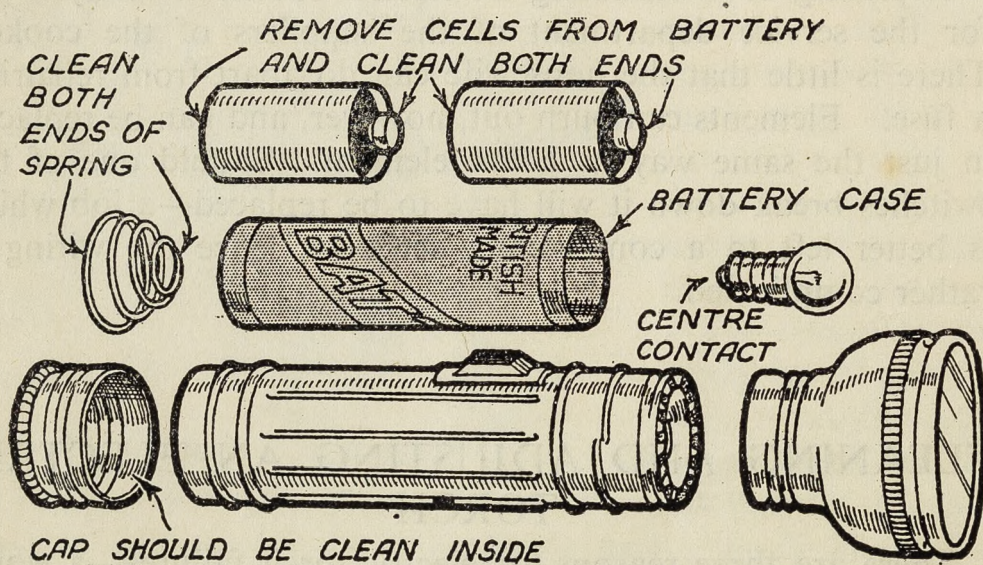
An "exploded" view of an electric torch showing the points to examine in the event of a failure.
